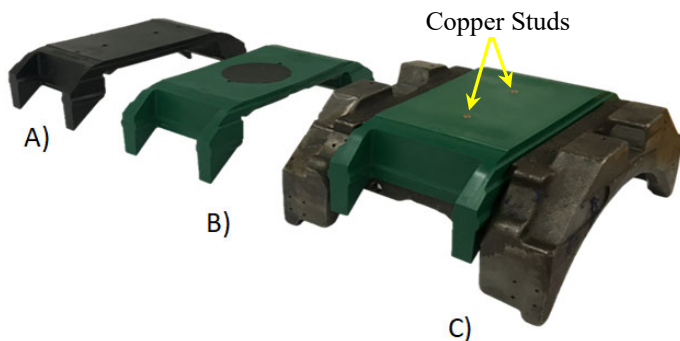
(A) CNF PROTOTYPE PAD, (B) INITIAL PROTOTYPE WITH CNF INSERT, AND (C) ADAPTERPLUS™ STEERING PAD WITH COPPER STUD DESIGN ON A STEEL BEARING ADAPTER.
